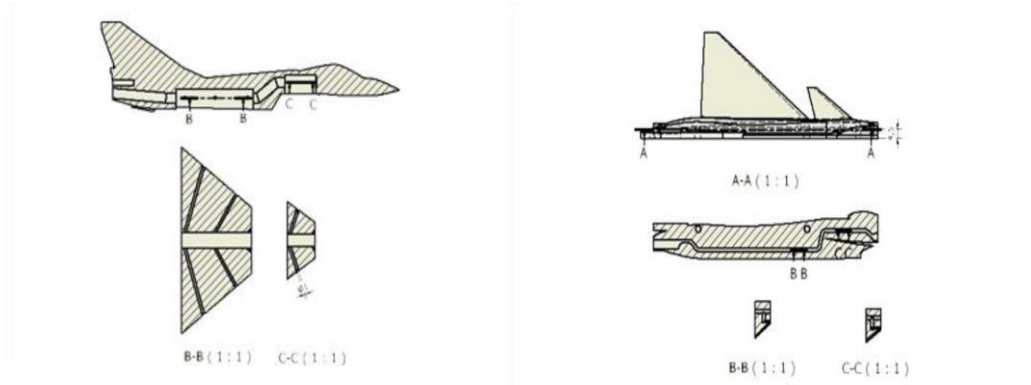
a) Channels in the model with the first system, and b) The second ink injection channel in a model fighter similar to Chengdu J-10
